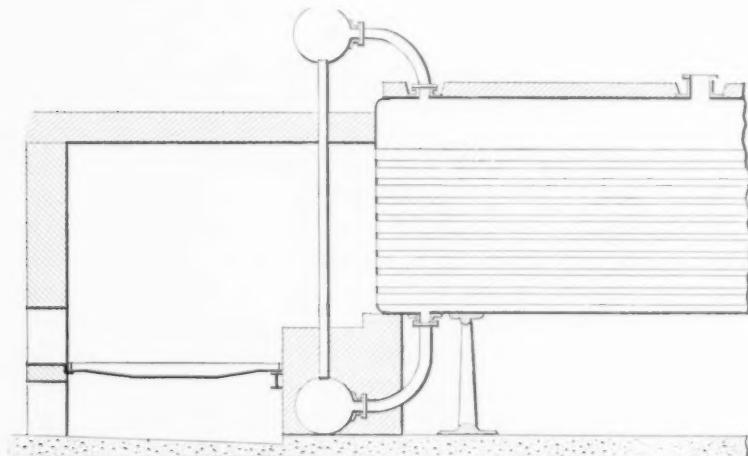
SHOWING WATER LEG TO LOWER TEMPERATURE OF GASES IMPINGING ON TUBE SHEET
